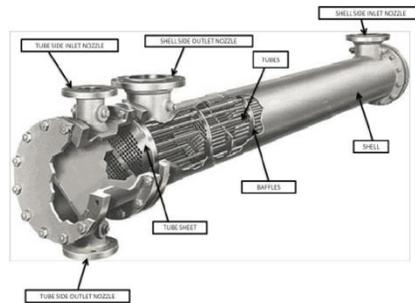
Basic components of Shell and Tube Heat Exchanger
